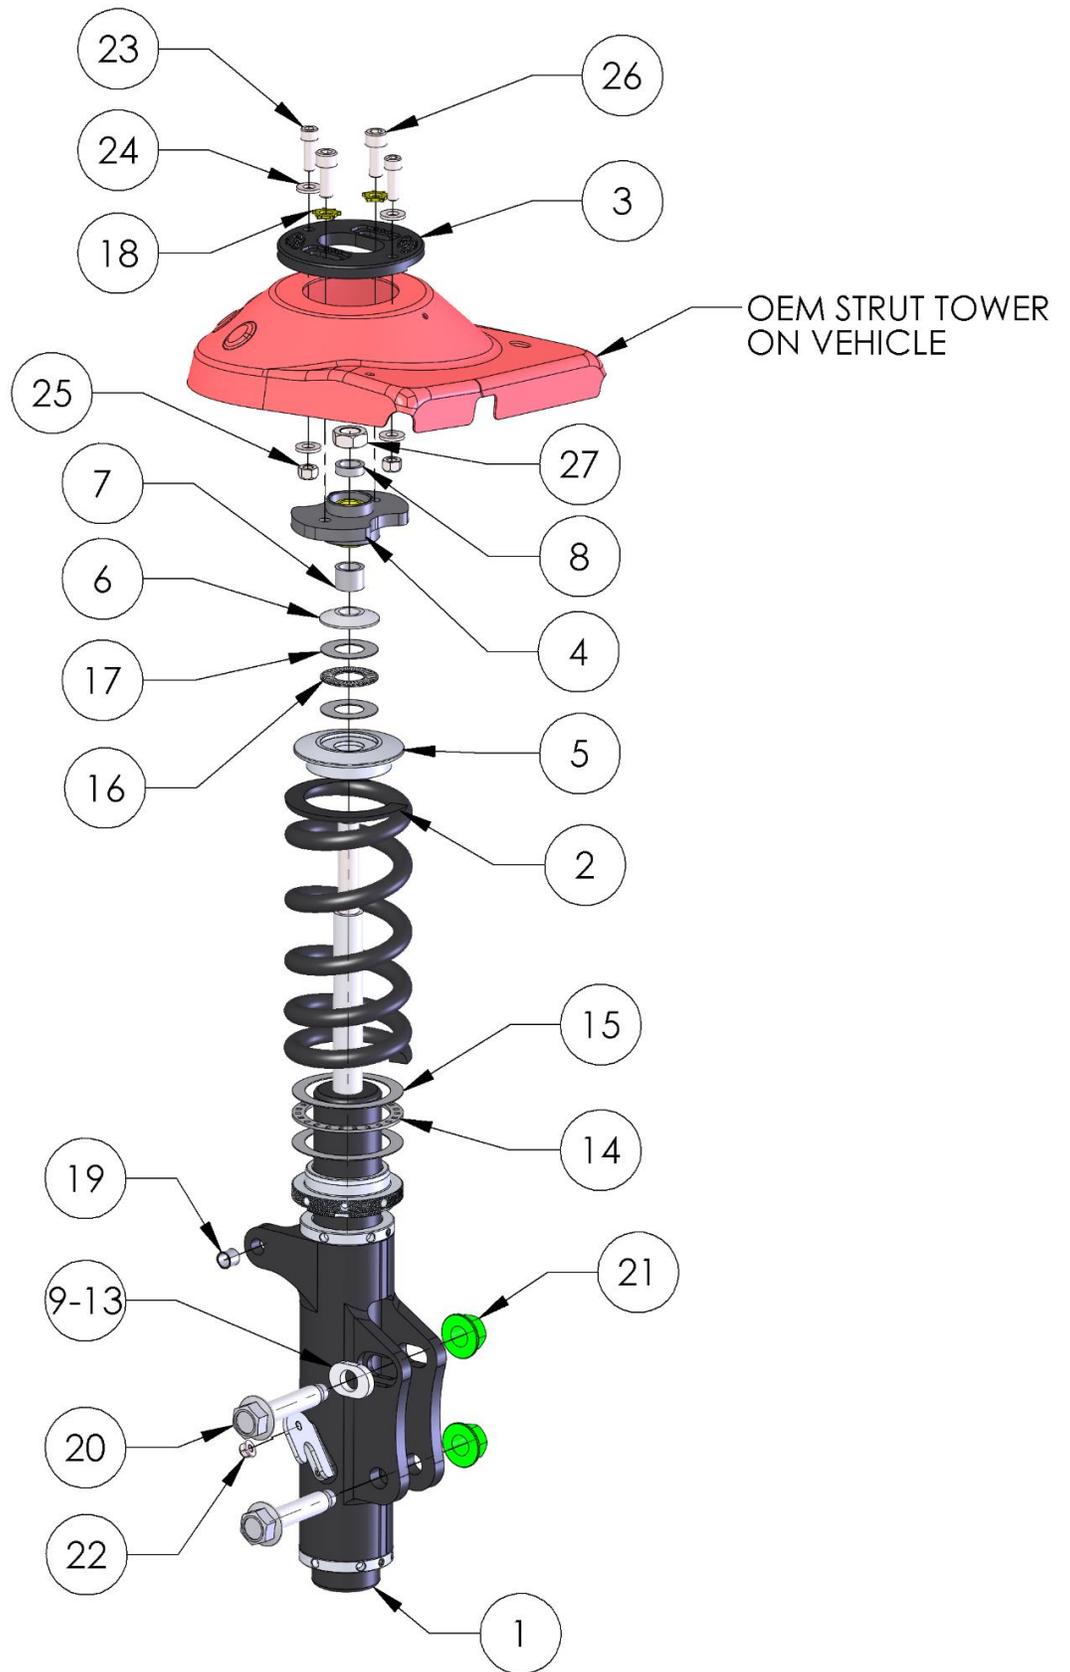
General Assembly Exploded View, LH - Passenger Side
